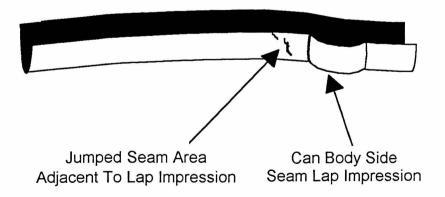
View of coverhook at the crossover (lap) of soldered can.
